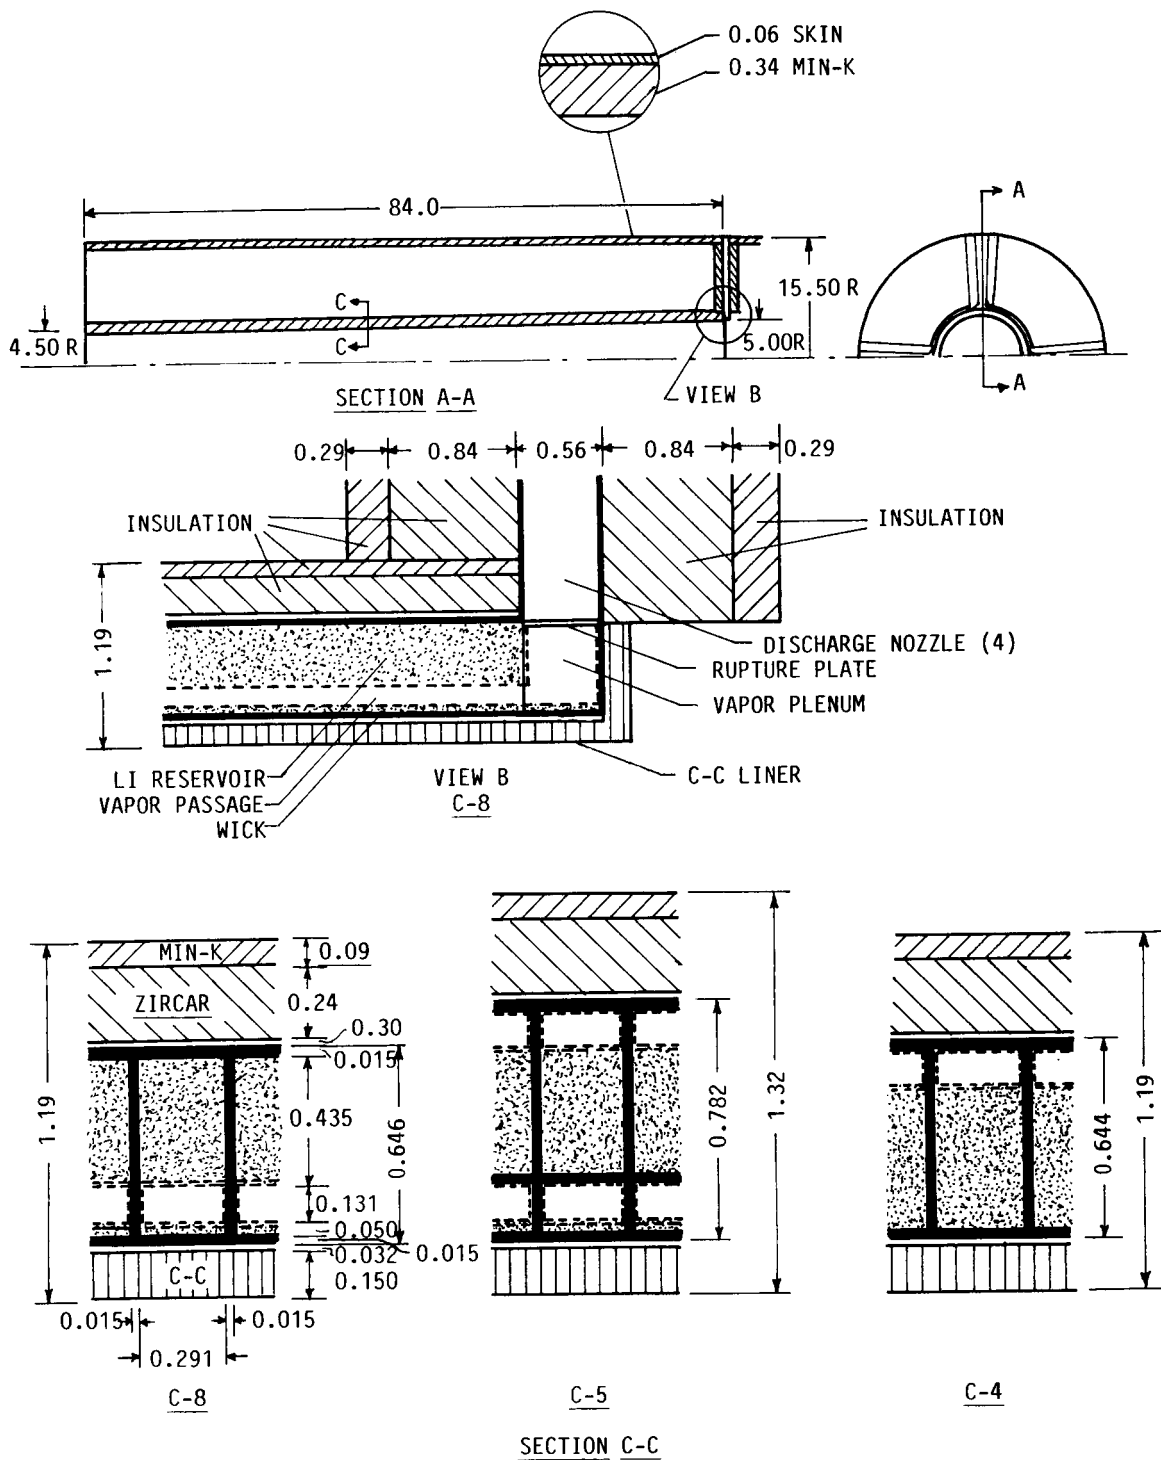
Preliminary Layout of Concepts C-8, C-5, and C-4
